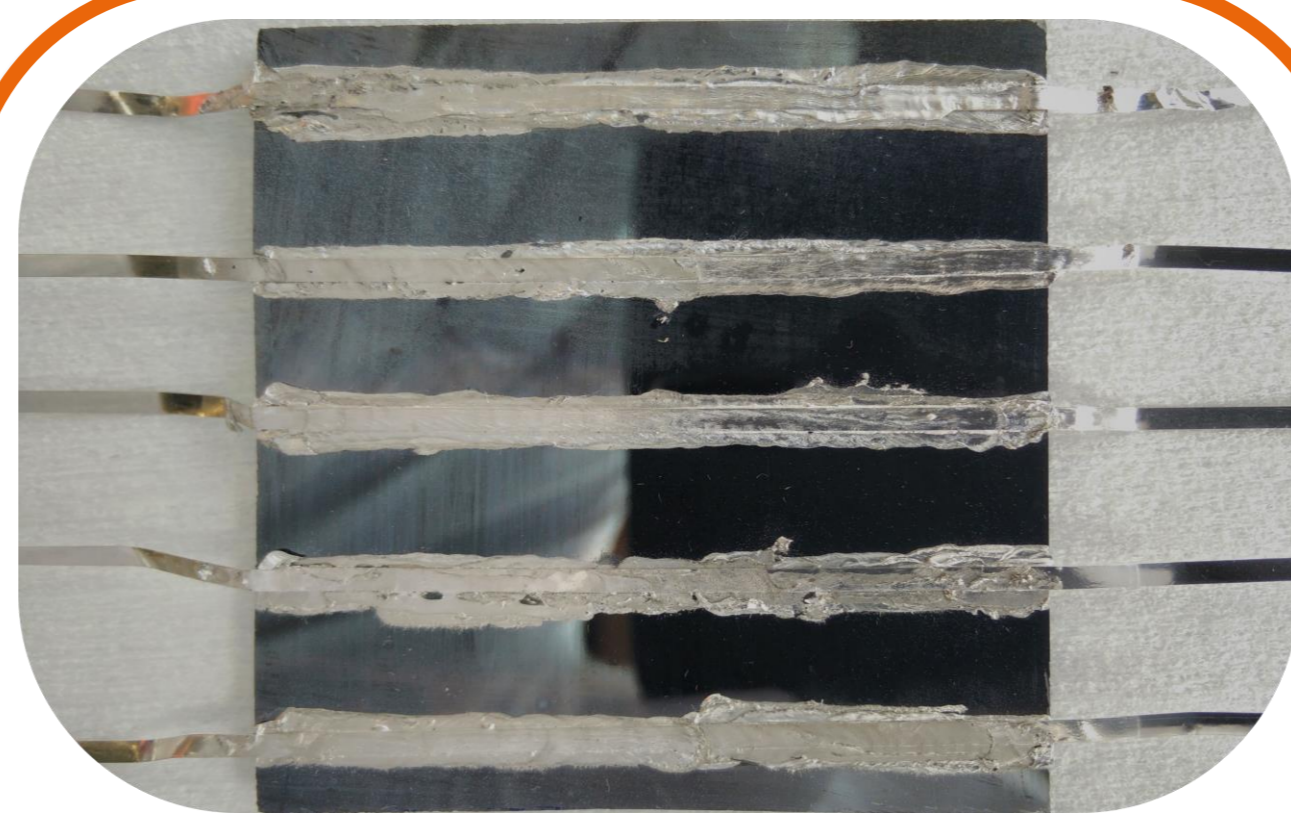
MoSe₂-sample with ultrasonic soldering technique
